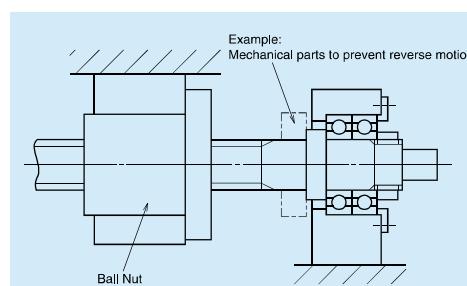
Nut and ball screw are required to be separated when installing in this structure.
